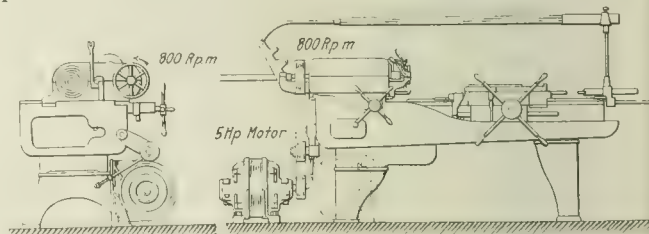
FLAT-TURRET LATHE WITH TWO METHODS OF MOUNTING MOTOR (ON FLOOR AND ON LEG)
